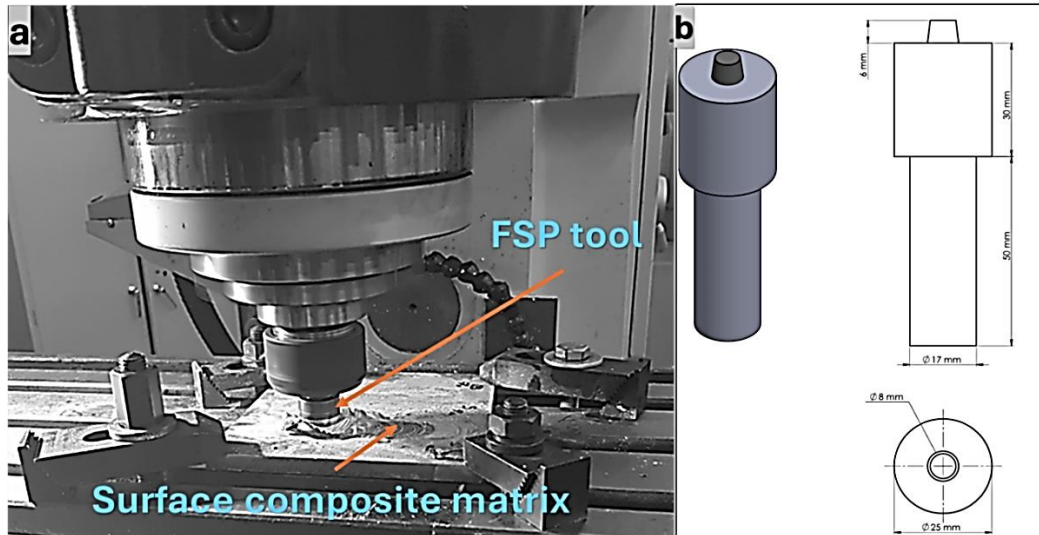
typical fabrication process using FSP (a) FSP using automatic milling machine, b) FSP tool design.
